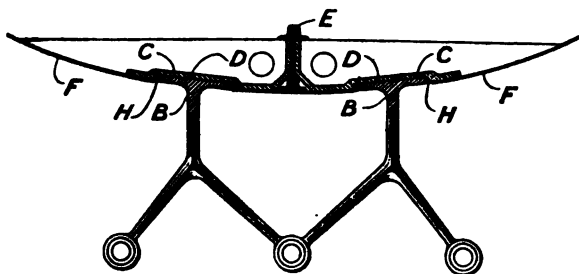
Propeller-shaft Support of Parsons and Wass : Sectional end elevation.
